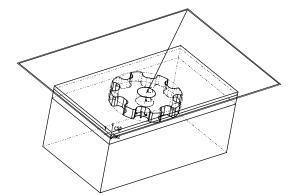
Manufacturing model for the cutting of a gear-type part.
